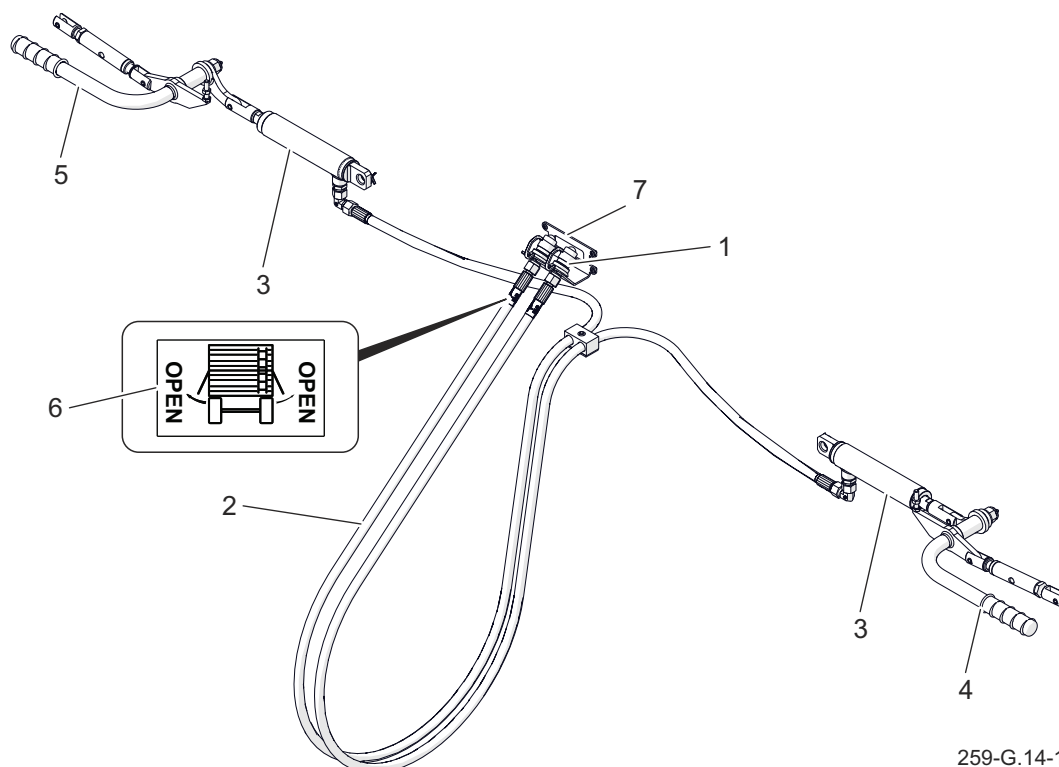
Construction of the hydraulic system for the side walls unlocking
